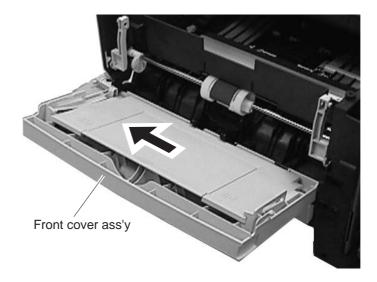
Paper Pick-up Roller (multi-purpose) 6
